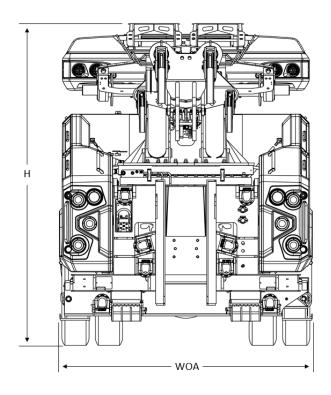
CHASSIS DIMENSIONS - TOP VIEW (EXAMPLE)
